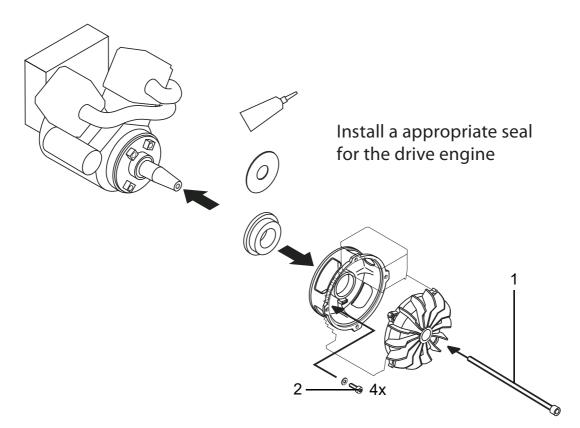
Assembly of single-bearing brush generators with tension bolts
